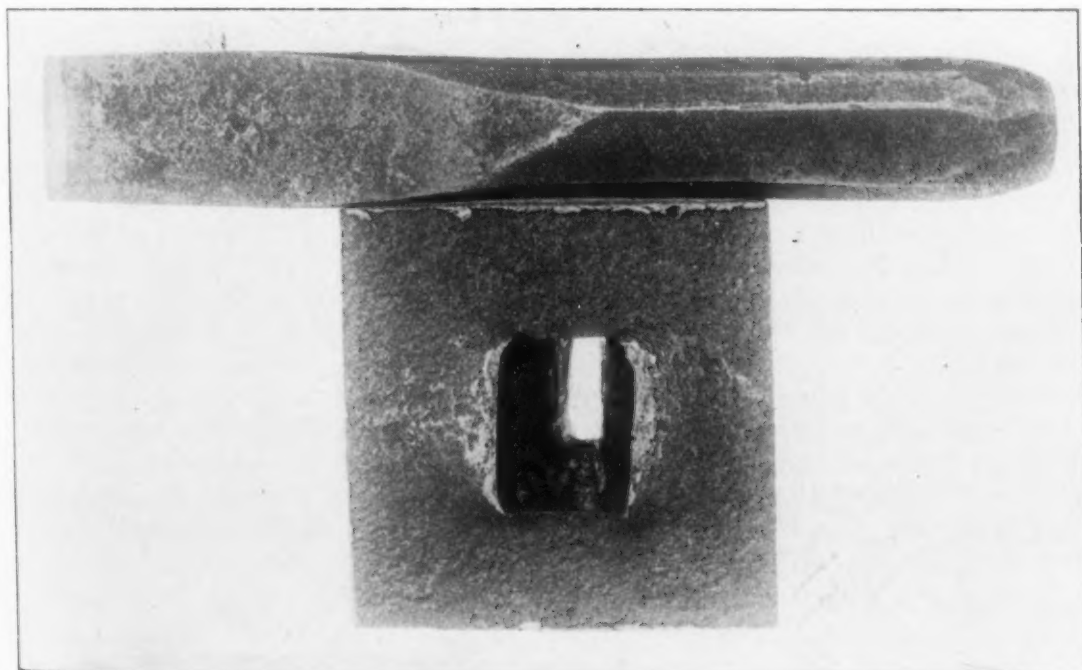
End View of Steel Block Showing the Clean Cut Hole Made by Driving the Chisel Through It—This Is the Same Block Shown in Fig. 4
